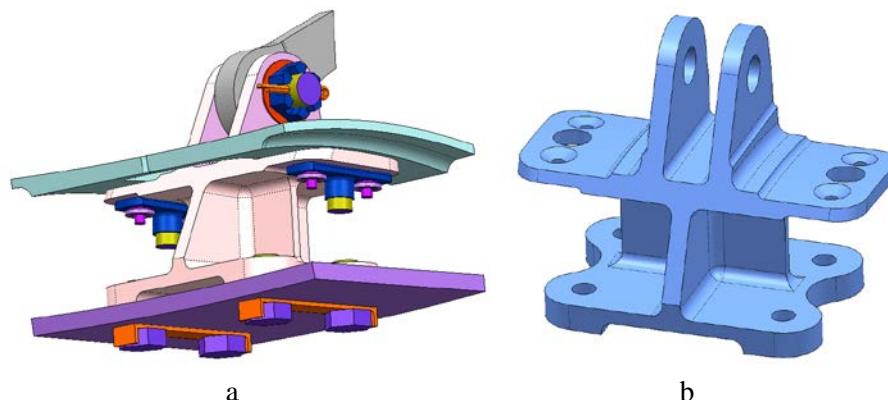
The geometry of a source model of the part under investigation: a – assembly; b – single.
